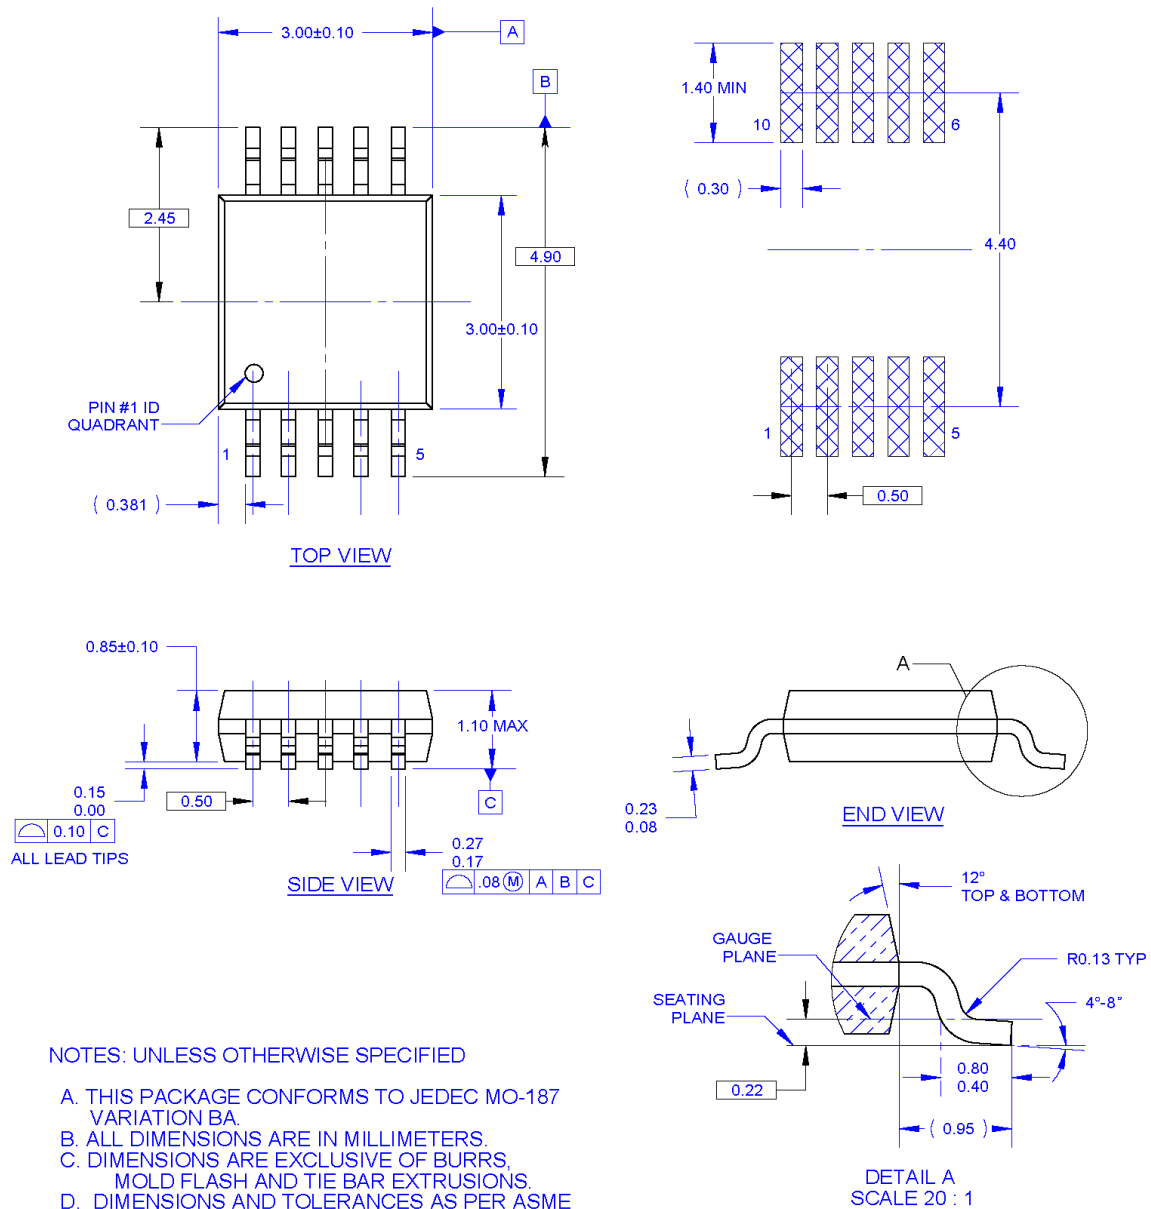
10-Lead, Molded Small Outline Package (MSOP)
